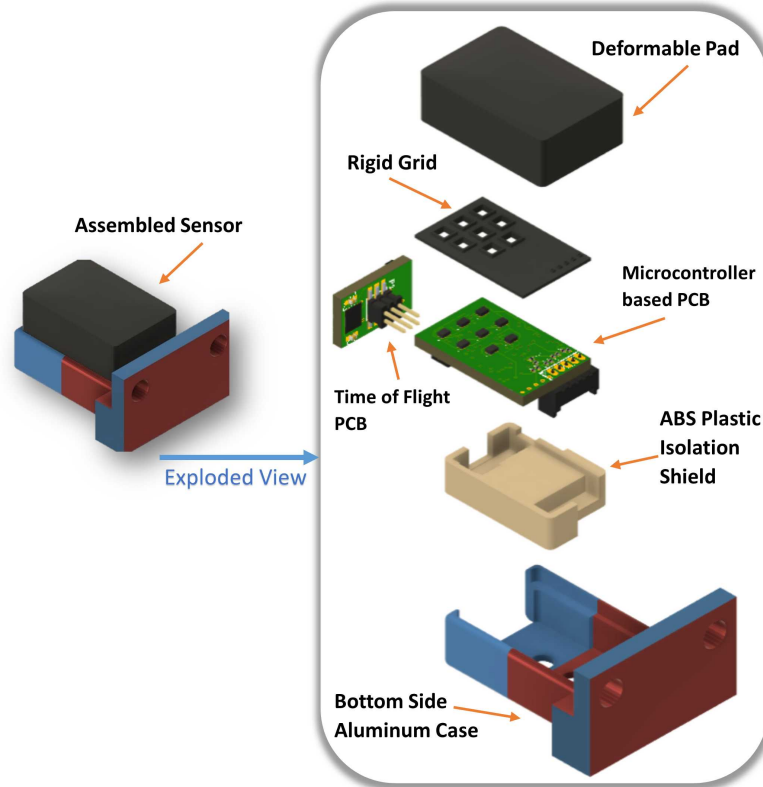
CAD of an assembled sensor (left) and exploded view with all components (right).
